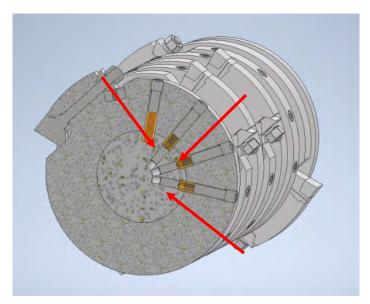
Setscrews Below Shear Pins Do Not Need to be Removed
